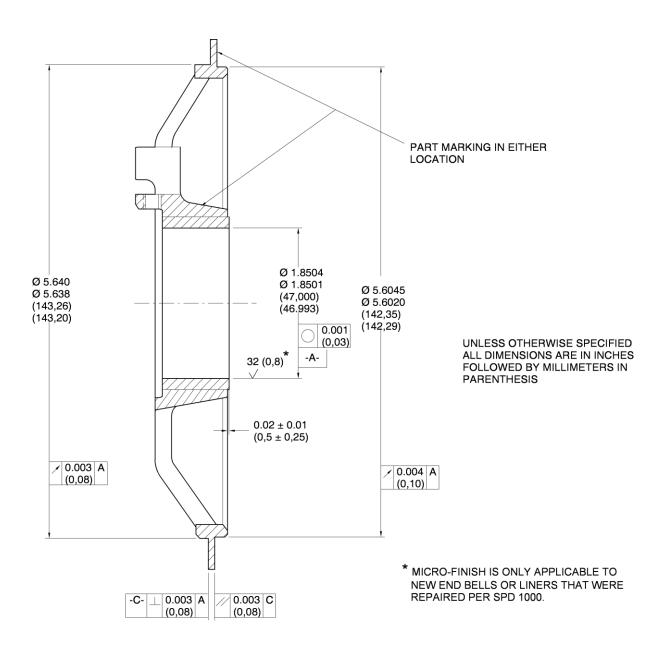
Drive End End Bell Bearing Liner Machining Specifications (Non-Preload)
